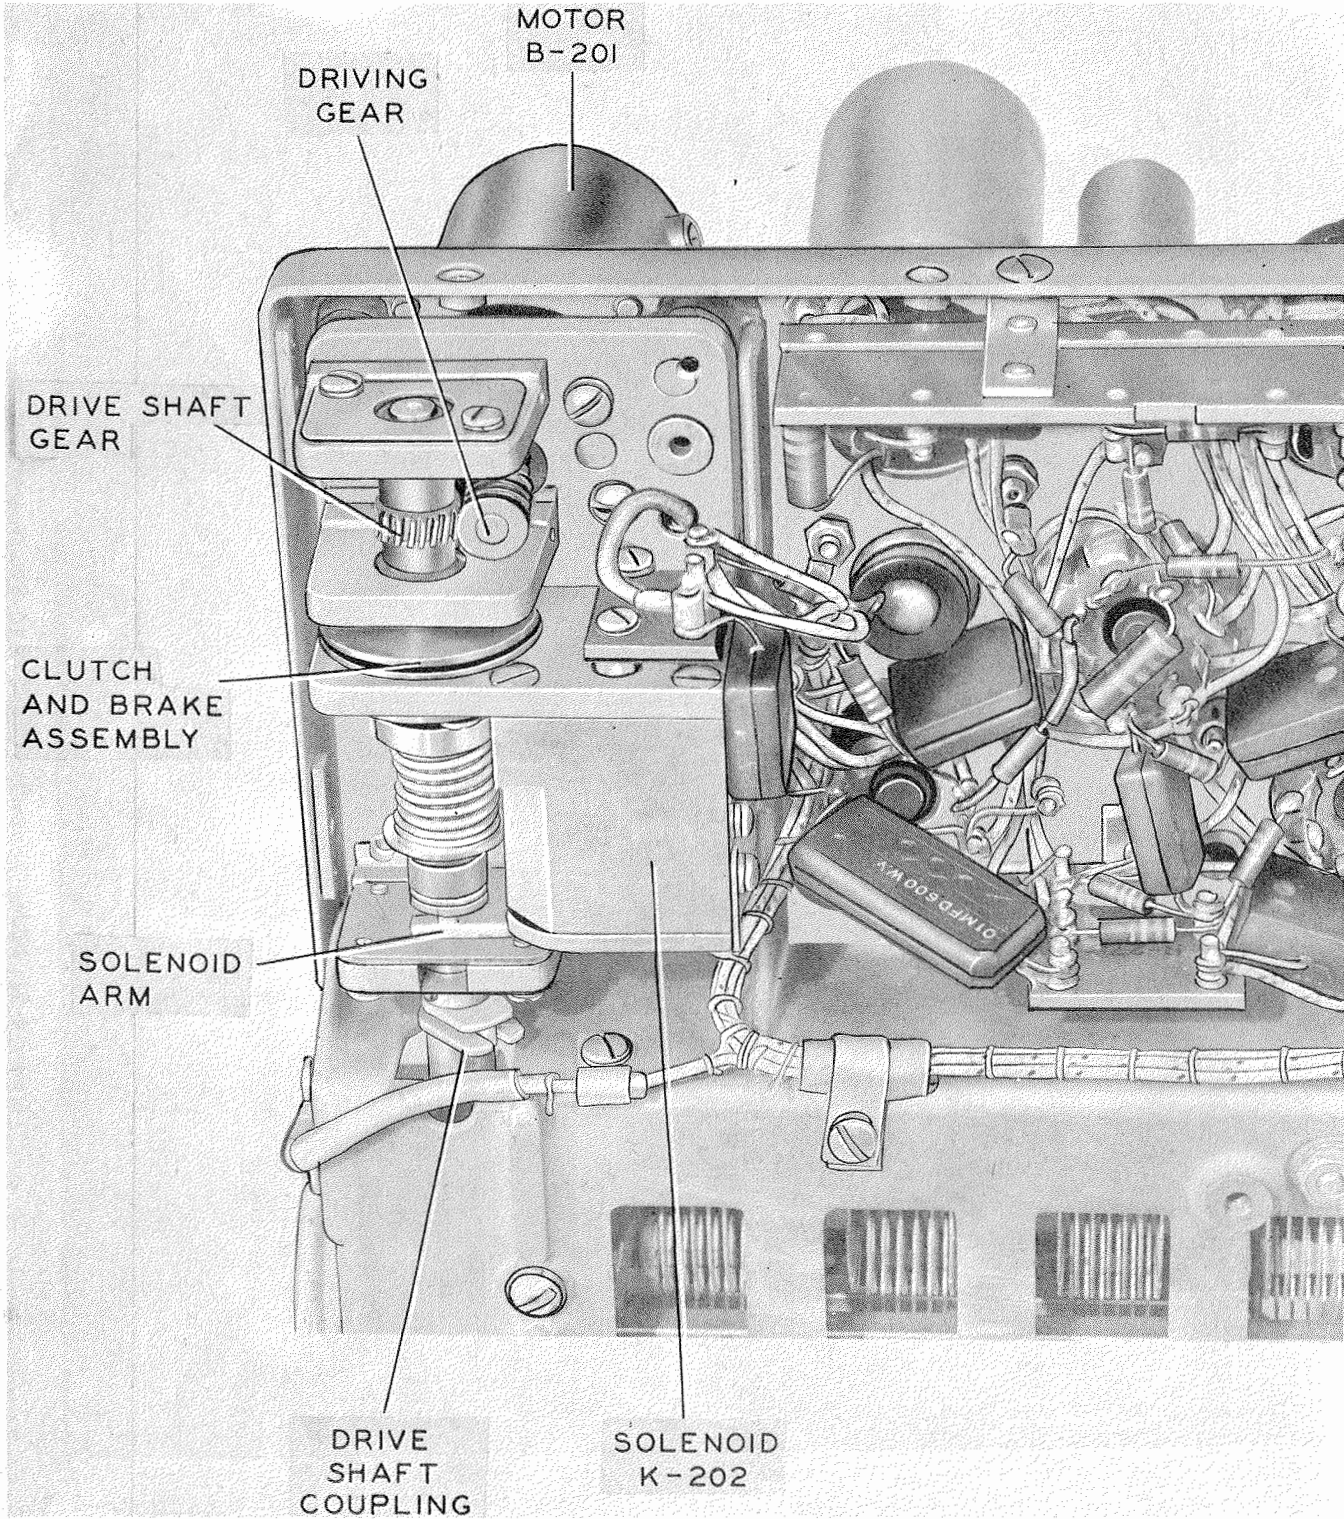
Radio Receiver—Clutch-Brake Mechanism With Worm Gear Housing Removed
